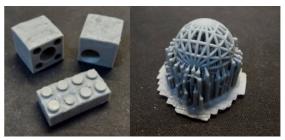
(a) shows horizontally printed objects that were lifted to a height of 5 mm on supports. This 'run-out' of layers occurs when the supports do not hold the printed layer sufficiently and it begins to fall before the next layer is printed. These defects can be avoided by printing objects flat on the platform, by rotating them at an angle, or by adding more supports of appropriate parameters.
